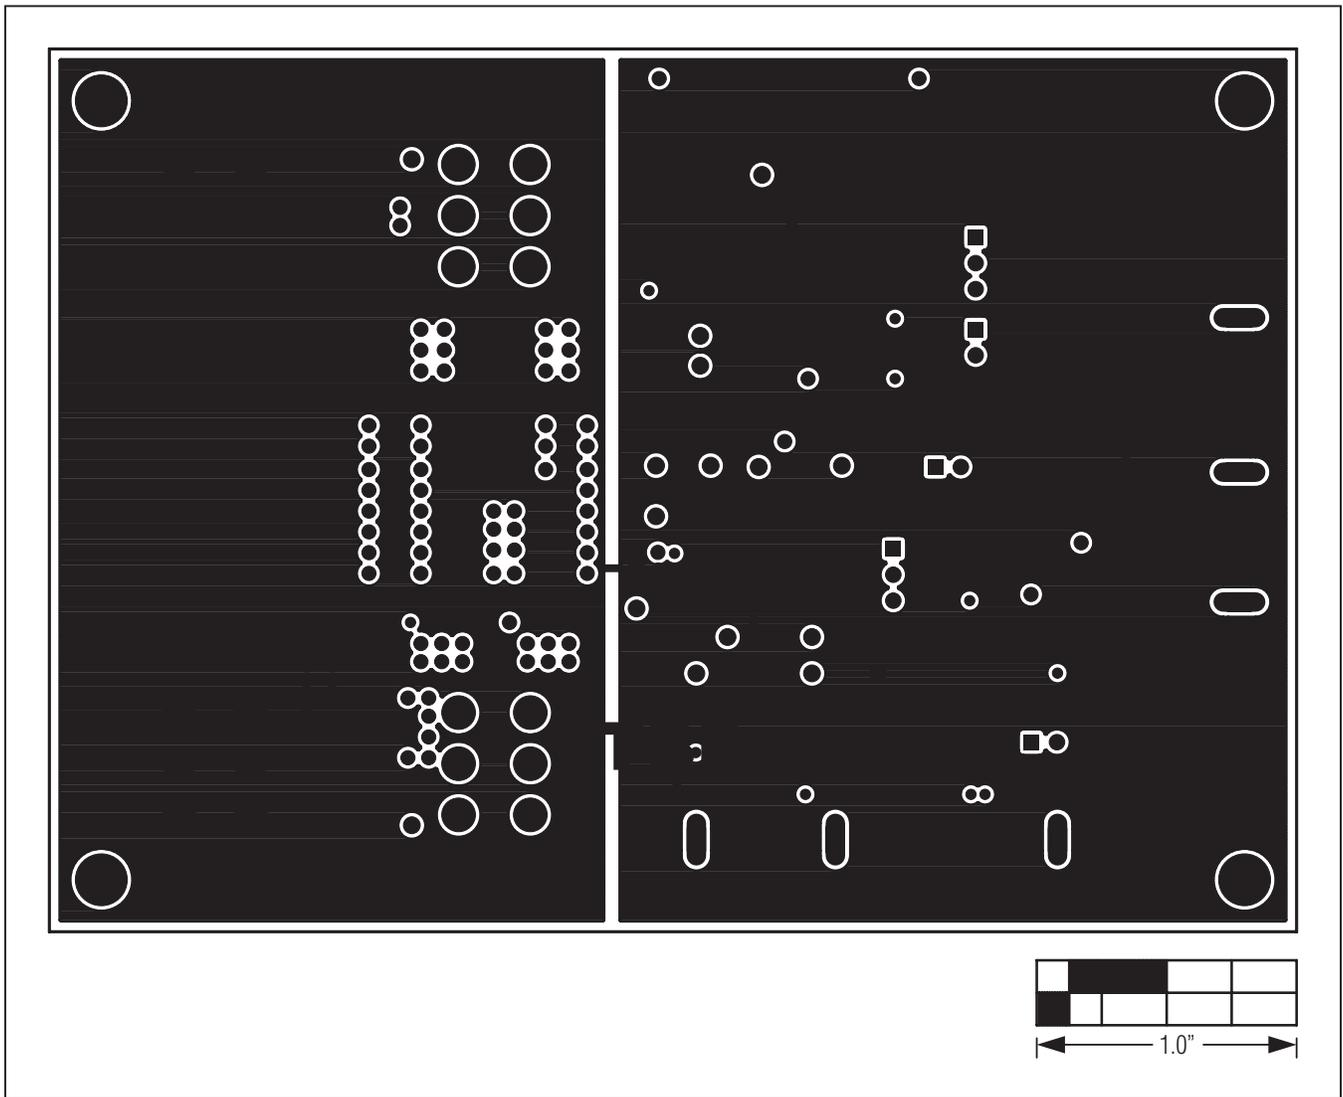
MAX5977A EV Kit PCB Layout—Inner Layer 2
